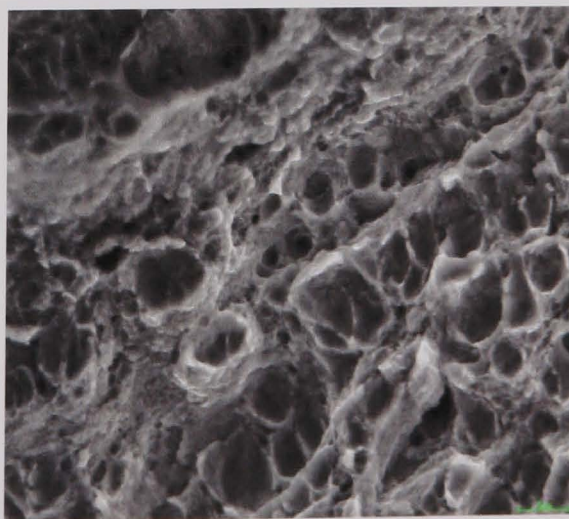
Typical fracture surfaces – specimens subjected to J tests
